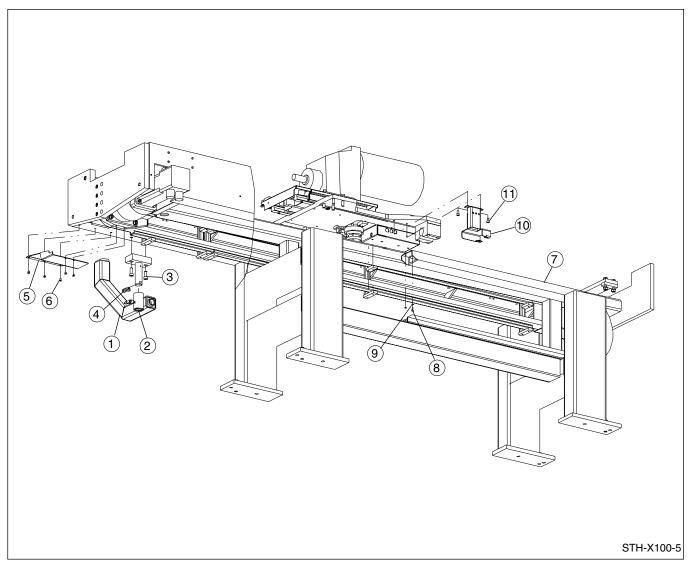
FIGURE A - TUBE HONE MACHINE BASE ASSEMBLY (5 of 8)
